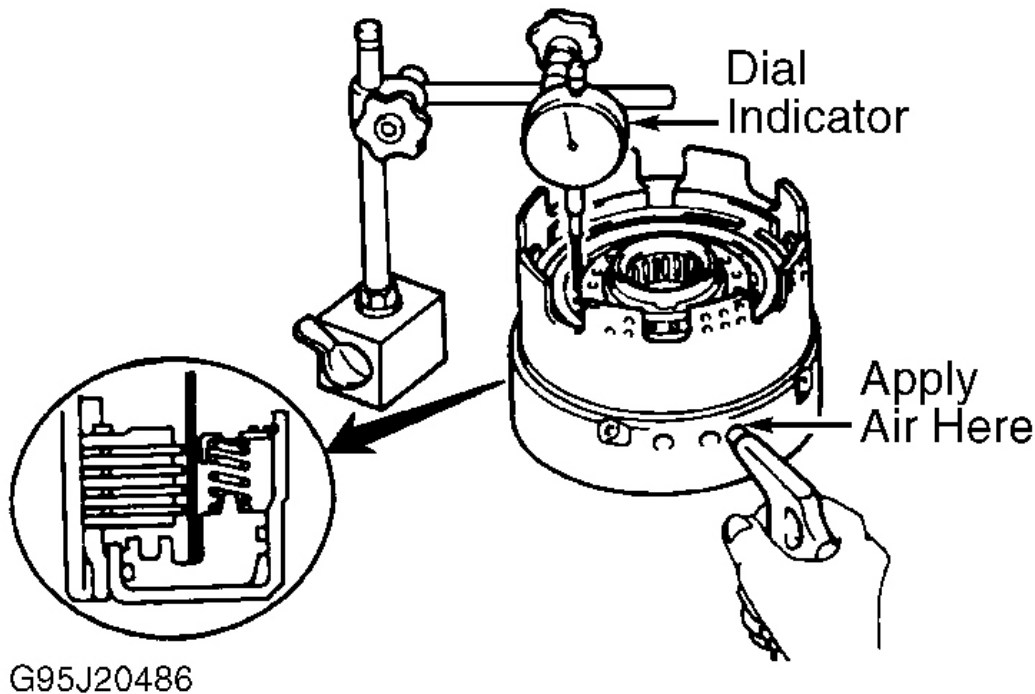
Removing Direct Clutch Piston & Measuring Stroke
